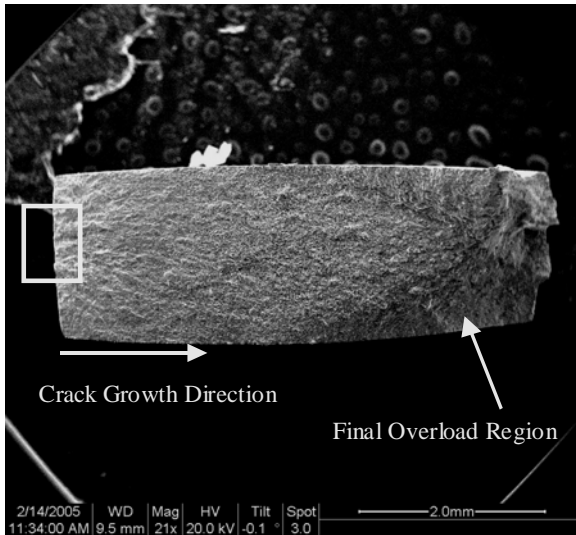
Specimen Ti-08, overall view of fracture surface
